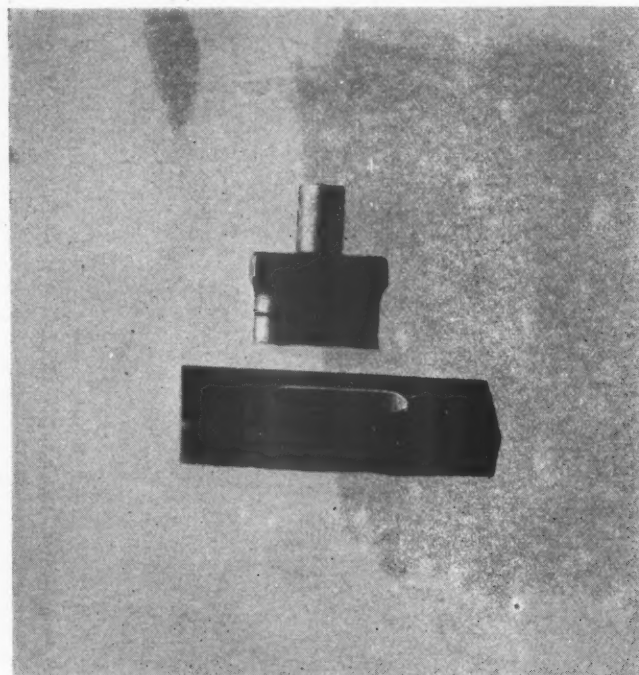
Punch and die with a high speed steel insert for punching holes in spring plates
